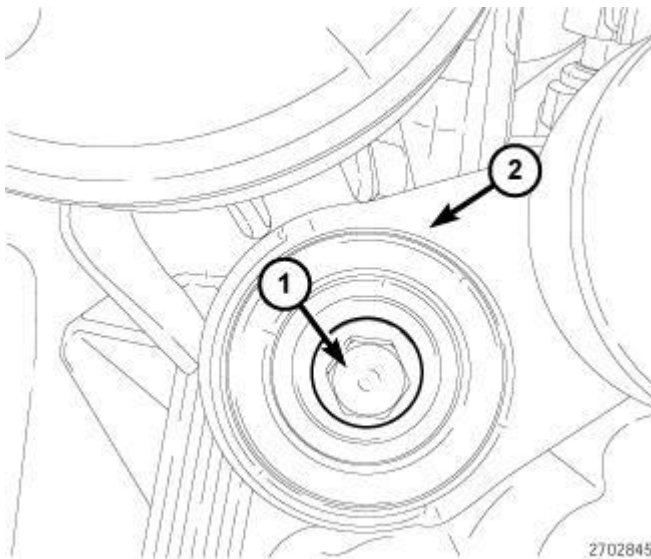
SERPENTINE BELT TENSIONER & BOLT
